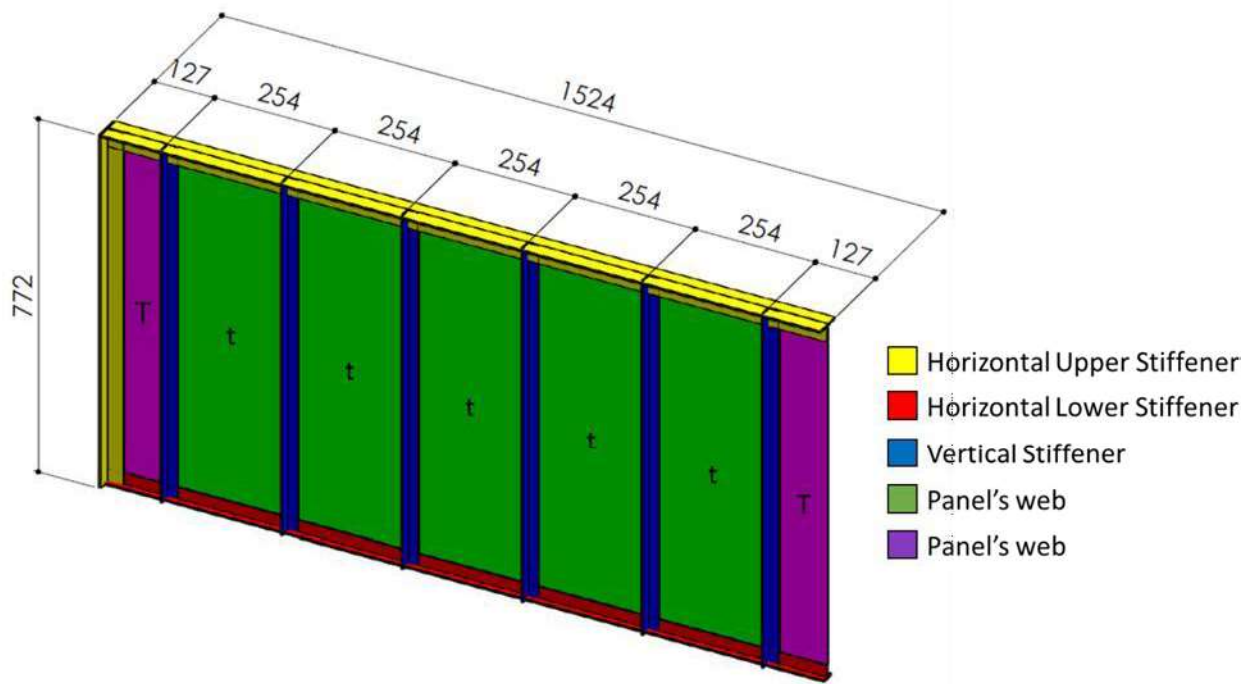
Metallic reinforced panel 3D model – geometry (all dimensions are in mm).
